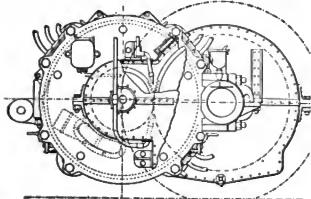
ELEVATION OF MOTOR AND GEAR CASE, SHOWING METHOD OF LUBRICATION
